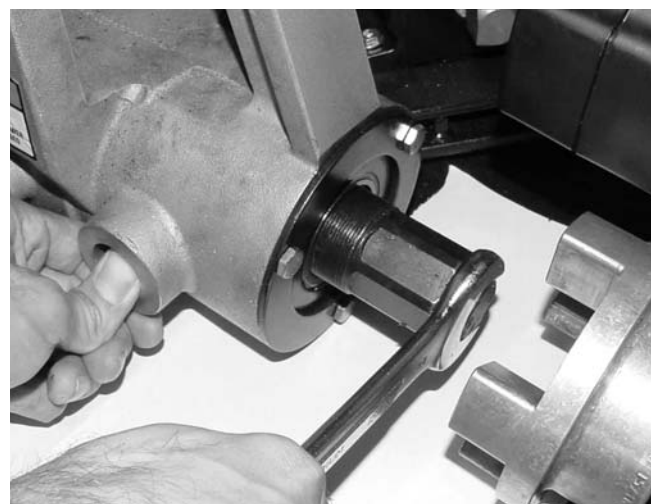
Engaging Spindle Lock and Loosen Draw Bolt
